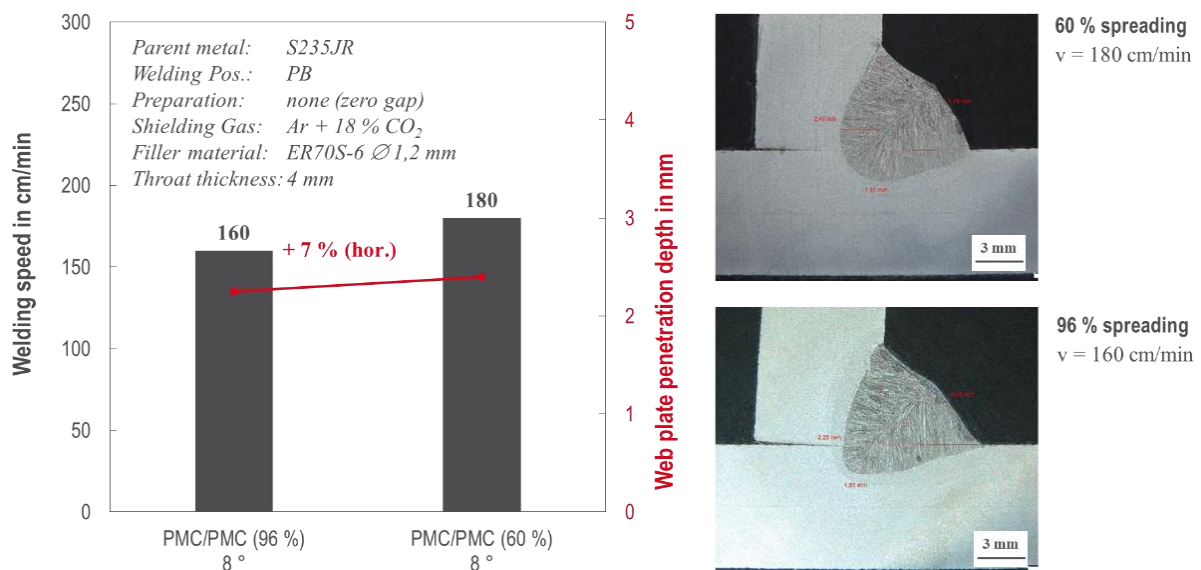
Further improvements in welding speed where reached by increasing wire feed spreading. Note that additionally the contact tip angle had to be changed to reach the maximum welding speed of 180 cm/min.
